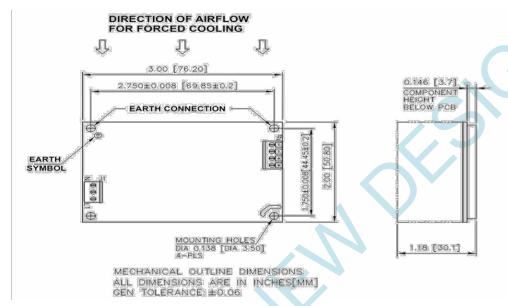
Mechanical Drawing - Screw Terminal (Option 1)
